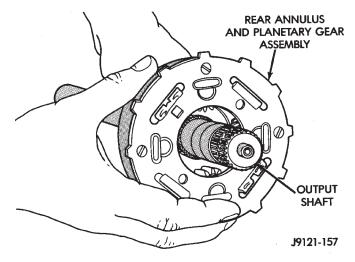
Installing Rear Annulus And Planetary On Output Shaft
